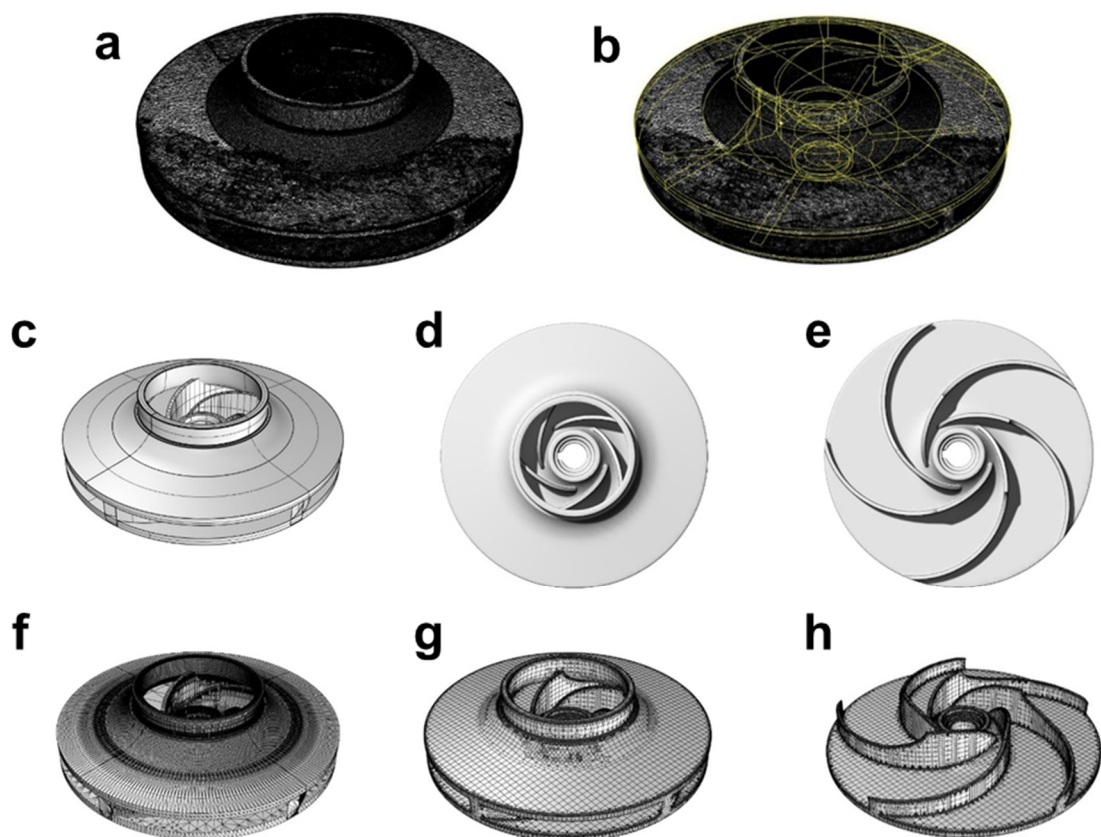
Flat impeller digitalizing and design: (a) impeller 3D scan, (b) impeller curves 3D scan, (c) surfaces solids design, (d) surfaces solids top view, (e) surfaces solids sectioned top view, (f) flat impeller meshes, (g) flat impeller surface meshes, (h) flat impeller surface meshes partial.
